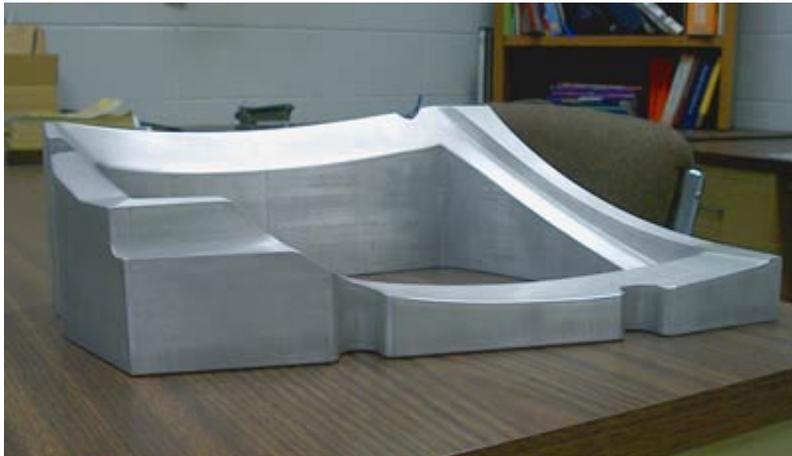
and 2 – A tooling for automotive parts developed at Advanced Machine Tool.
